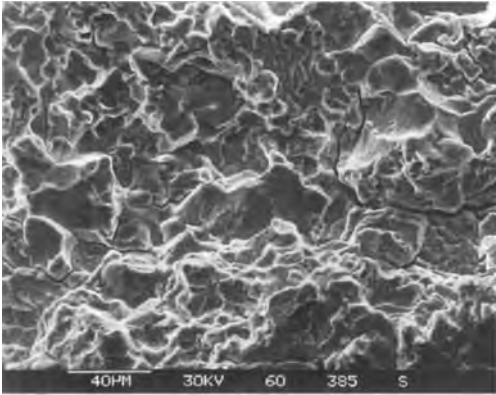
Reheat cracks in the HAZ of a weld in a coarse-grained austenitic stainless steel 1.4550 (field metallographic replica technique).
